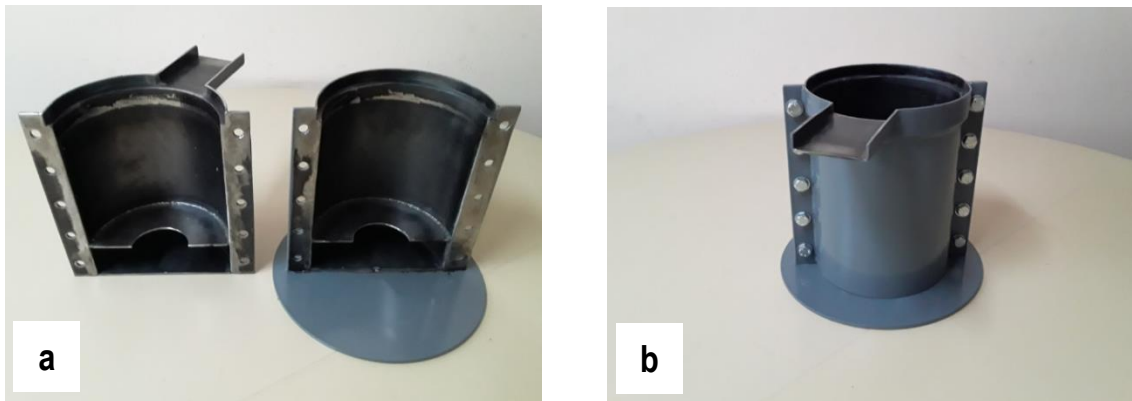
Disc liner mill vessel a) two half pieces b) assembled
